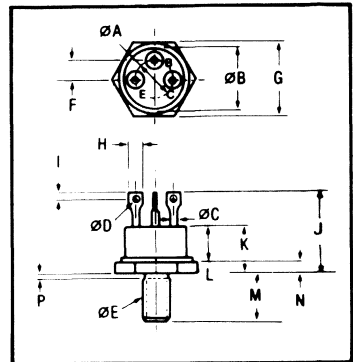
Dimensional Outline JEDEC TO-61, Isolated Collector Package
